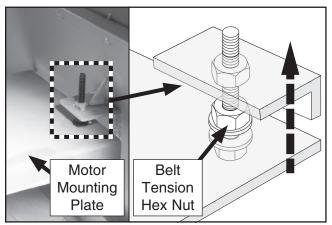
Location of belt tension hex nut for raising/lowering motor plate.
